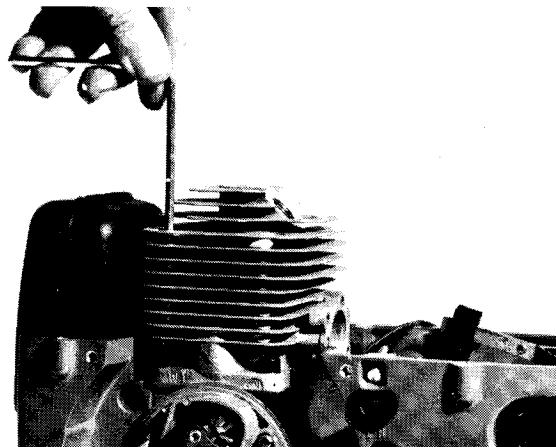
Remove the cylinder head, fan housing, silencer (muffler), the fuel hose attachment at the carburetor, the split pin at the choke control, and the intermediary section.
